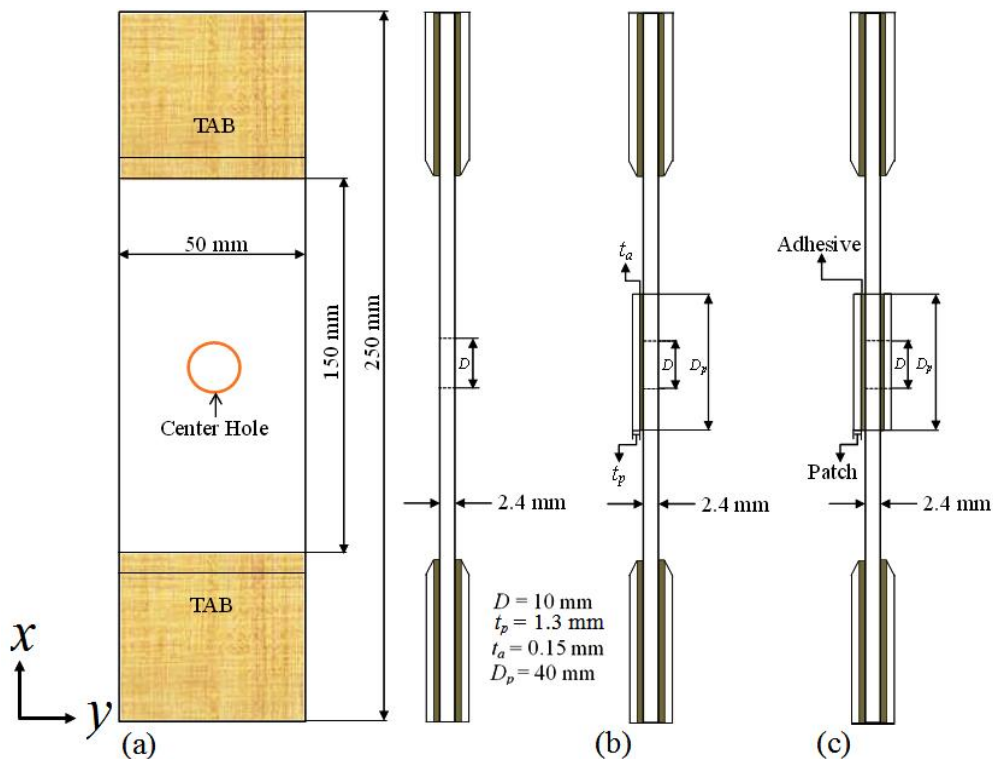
Geometry of the specimen (a) front and side view of circular cutout panel. (b) side view of single sided repair (c) side view of double sided repair (All dimensions are in mm)
